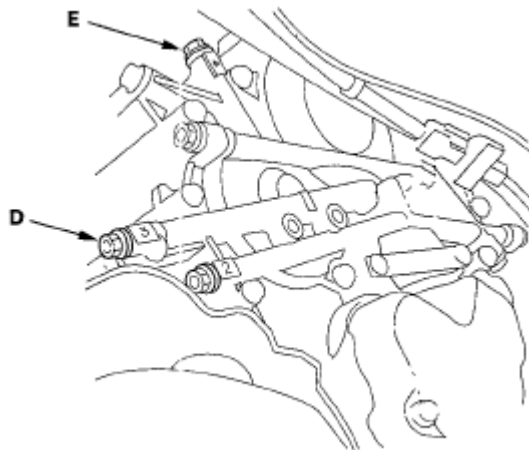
Identifying 3rd Clutch Pressure Inspection Port And 4th Clutch Pressure Inspection Port
